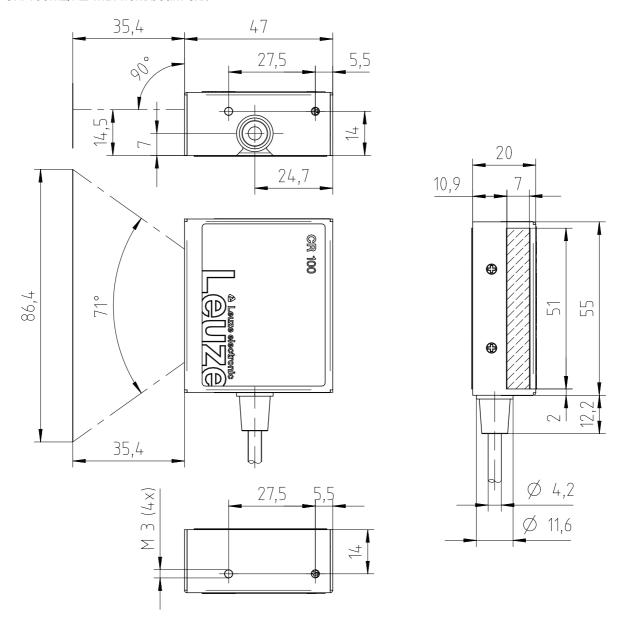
Dimensioned drawing of CR 100M2/R2 with front beam exit
